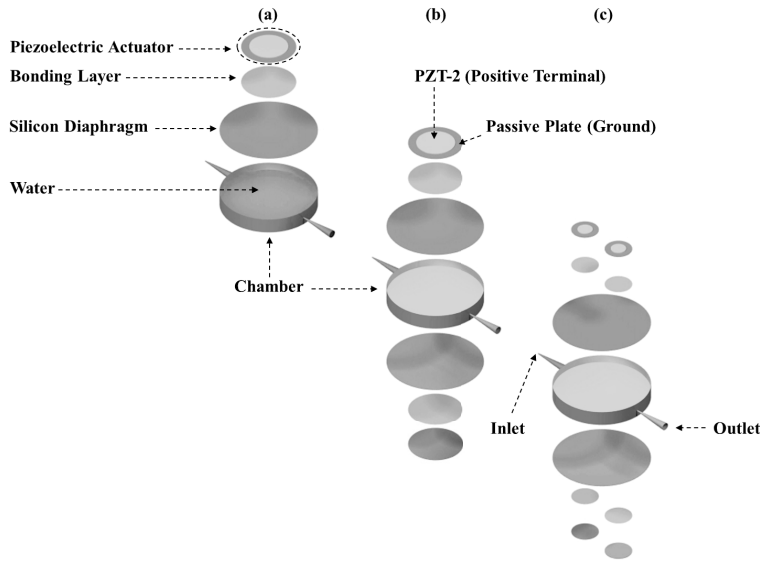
Exploded view of the micropumps: (a) SDM, (b) BDM, and (c) PSM.
